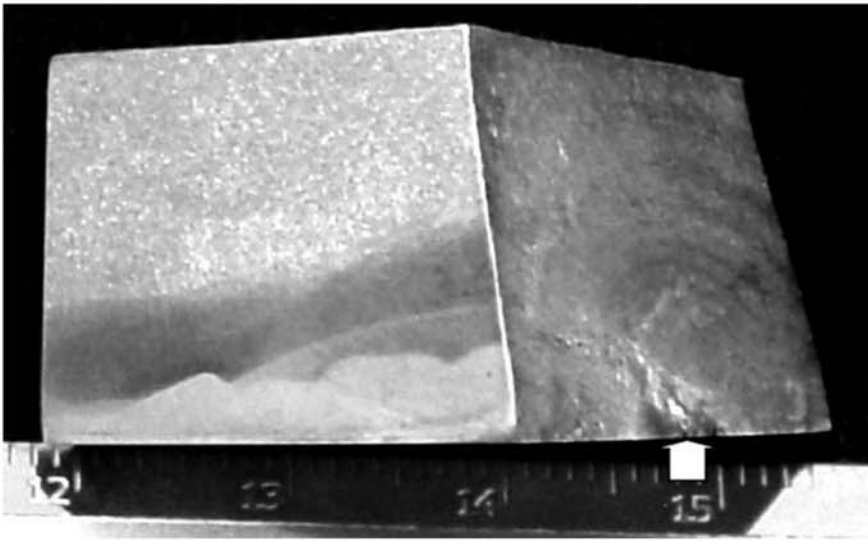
Region where the fatigue fracture of Fig. 15.24 started (right side) and a cross section in the axial-radial plane of the axis of Fig. 15.24. The macrograph performed on the cut surface (left side) indicate the presence of a weld repair, with the weld-deposited metal in the lower part of the image, a wide heat-affected zone (around 5 mm, or 0.2 in.) and unaffected material. Scale is in mm. Courtesy of MRS Logística S.A., RJ, Brazil.
